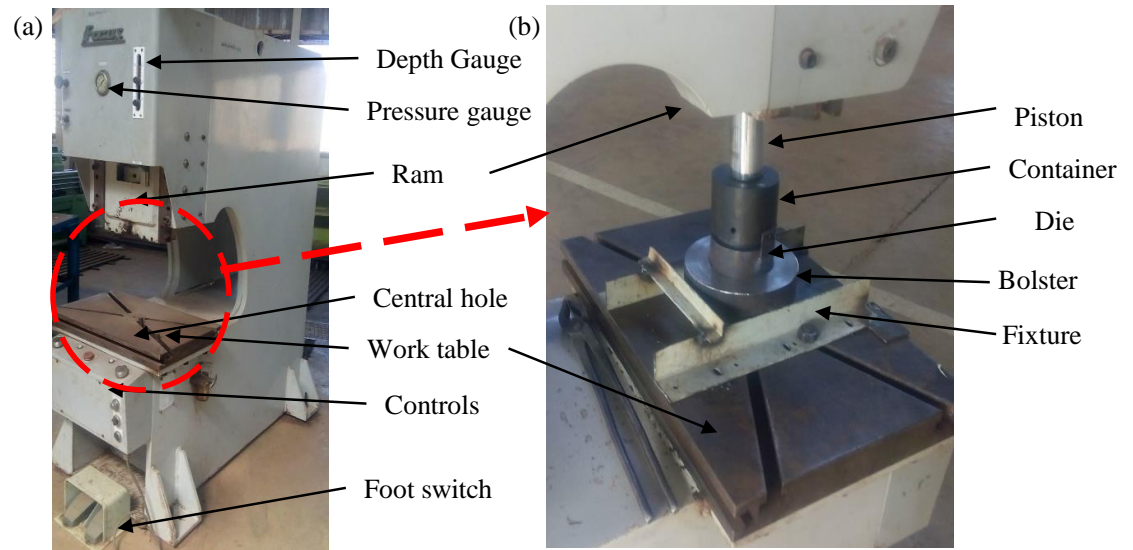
(a) General Purpose Pneumatic Press; and (b) Fabricated Extrusion Assembly Fixed Between Ram and Work Table of the Press
